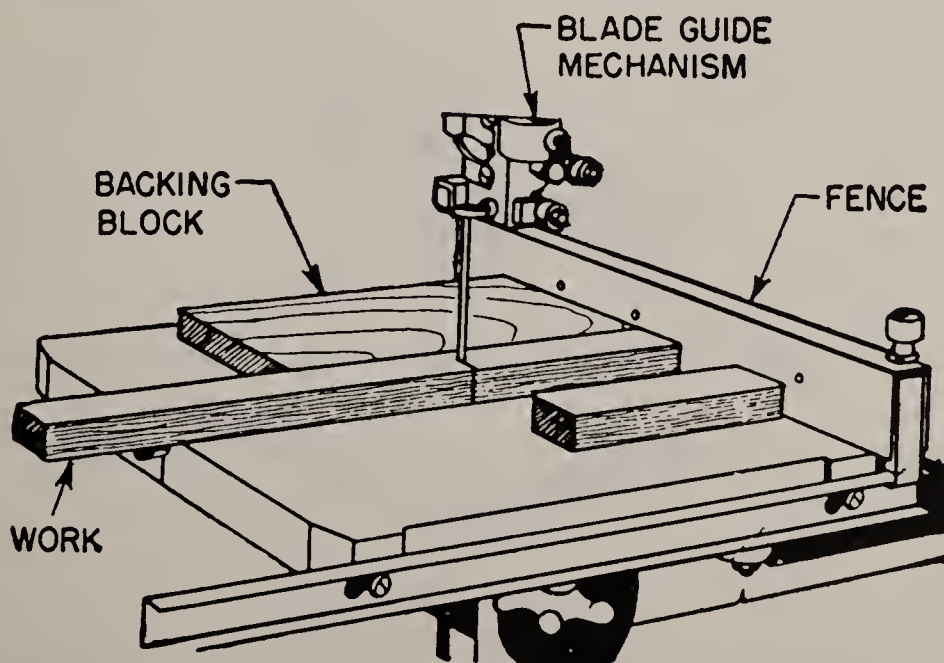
Method of cutting short pieces to length using square board or ripping fence, when the miter gauge is not available.
